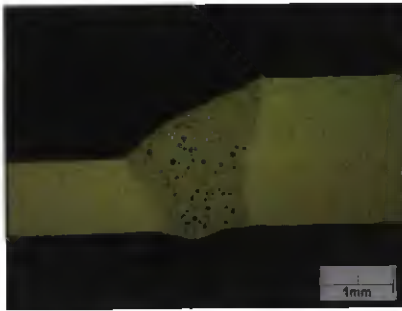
Cross section of an aluminum blank laser beam welded with modifications to the optics to control weld pool stability. Note the amount of porosity was controlled.
